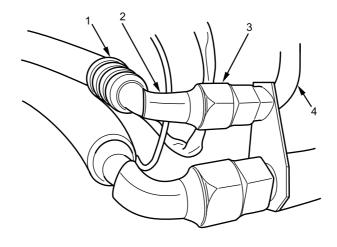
Evaporator Inlet Hose at Penetration Dust Plate.
